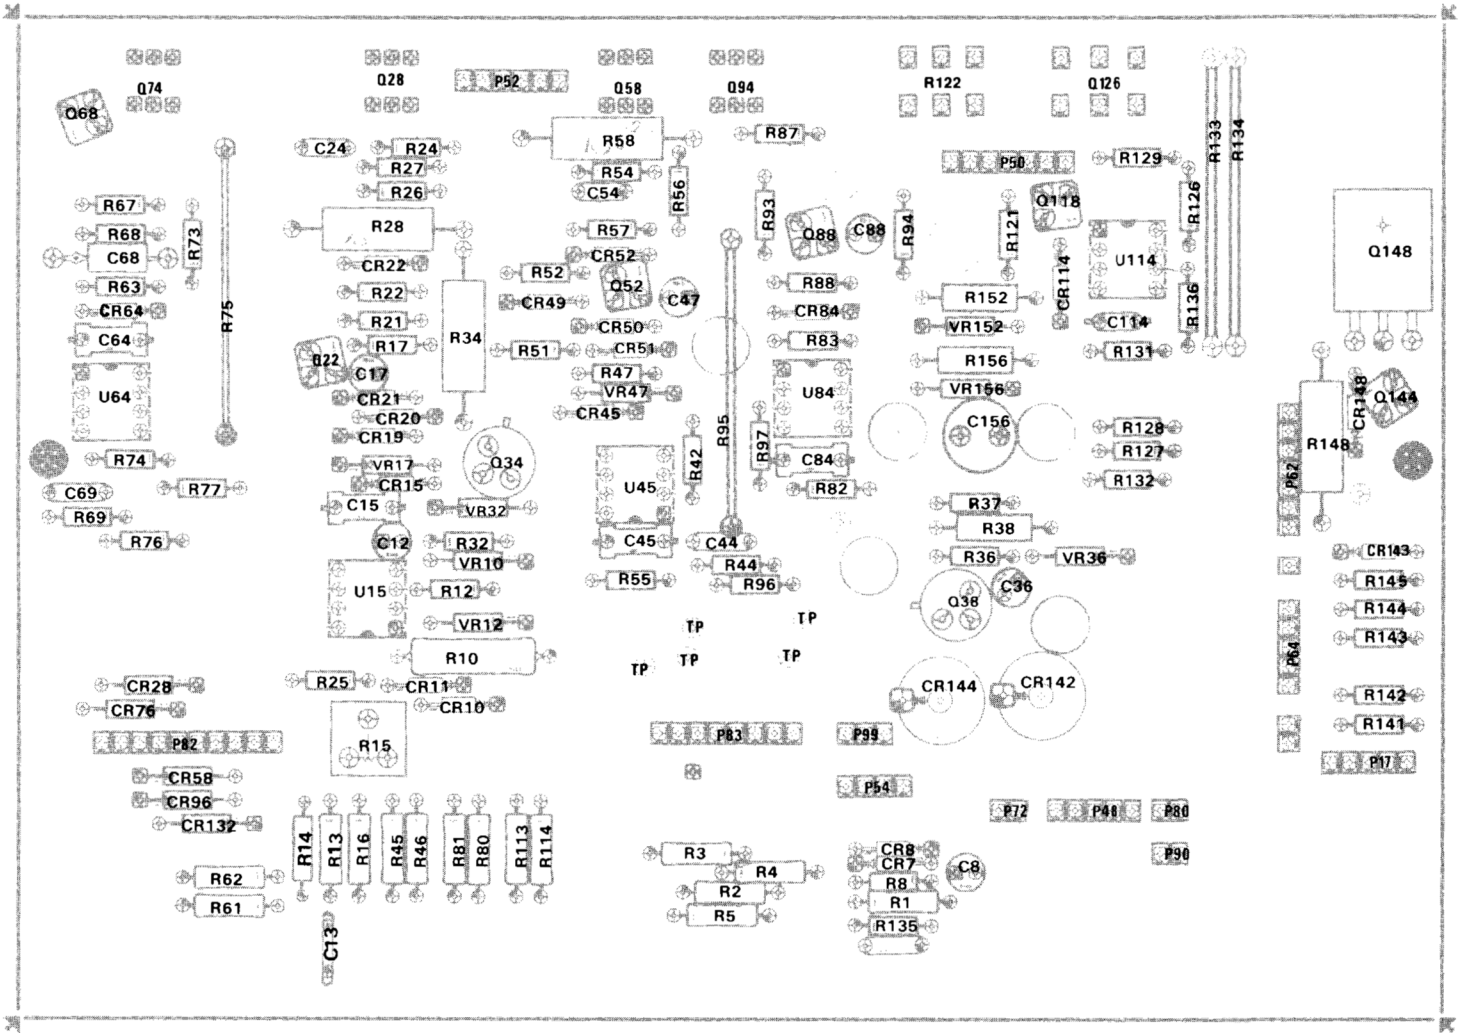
A14A2-Partial LV Regulator Circuit Board Assembly.
